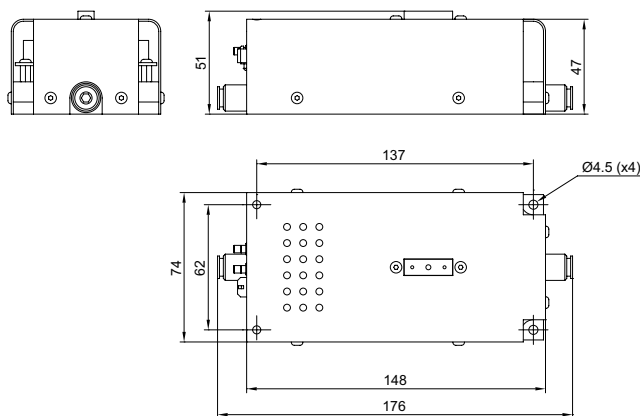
Outline drawing of encased version 2DPB2 series Pockels cell drivers
